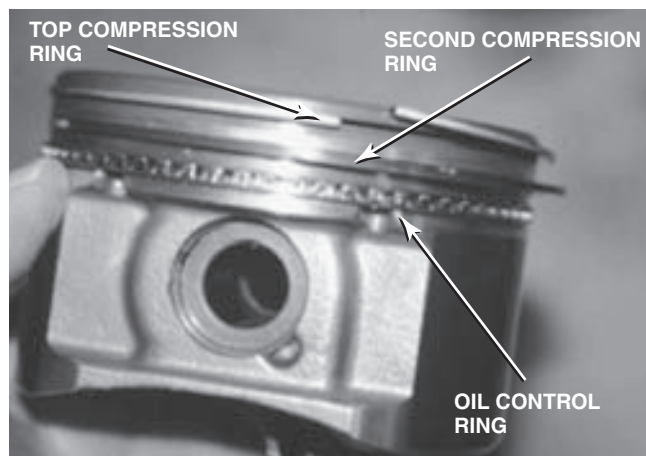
Most pistons use two compression rings and one oil control ring.
